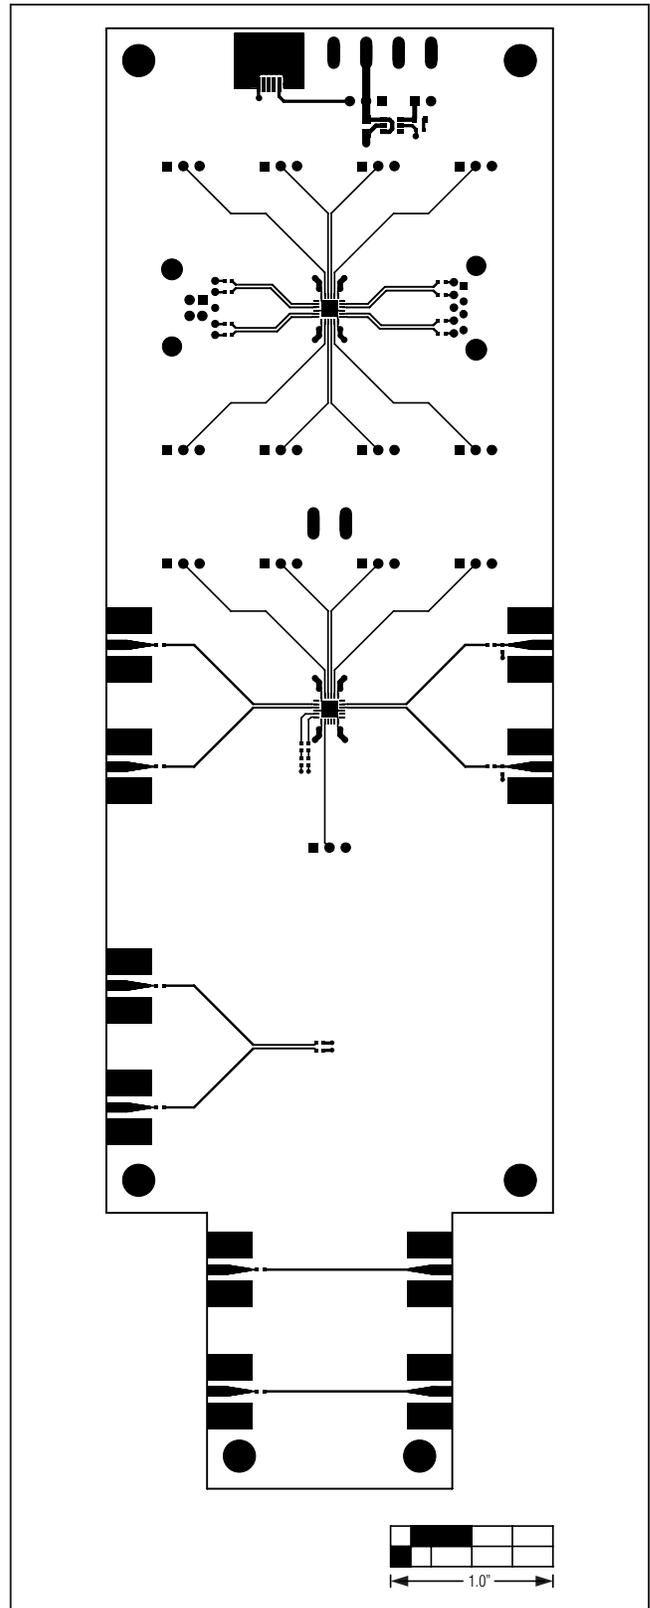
MAX14972 EV Kit PCB Layout—Component Side
